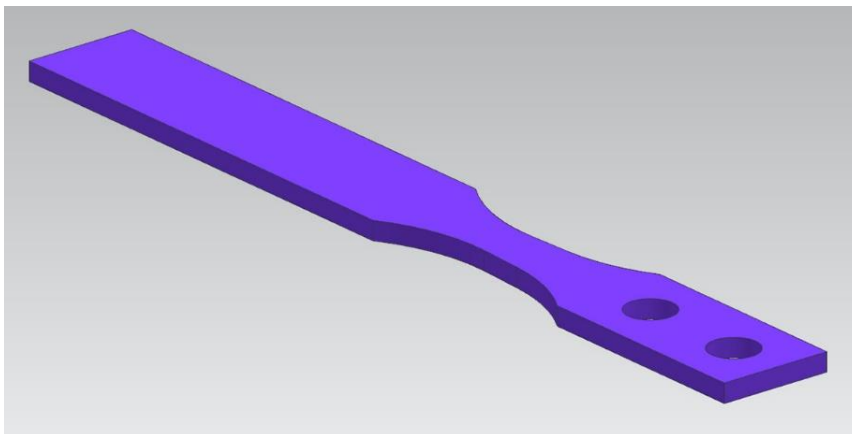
The Mold of Fatigue Specimens for CNC Machining Operation
